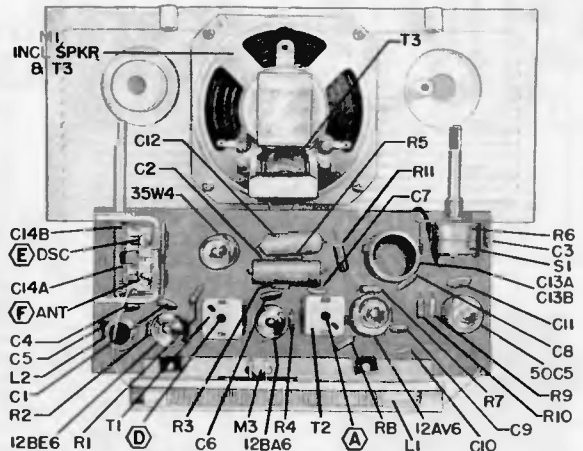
Top View of 5B4 Chassis Showing Location of Components and Alignment Points.
